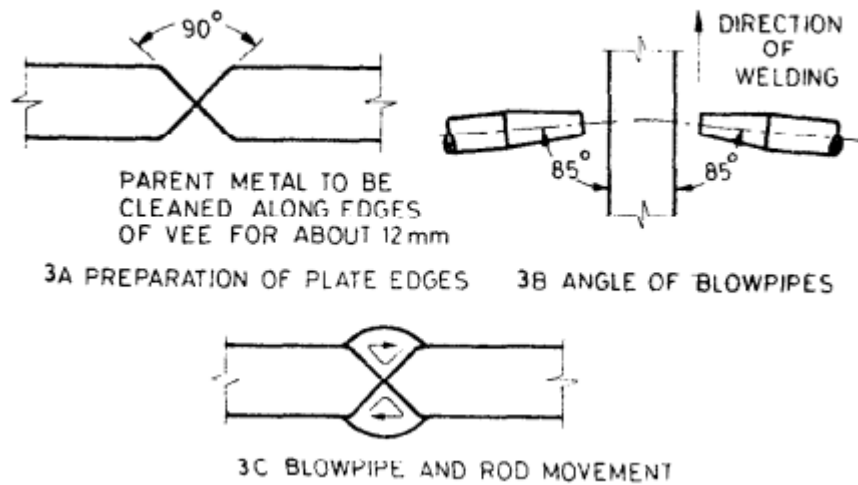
PREPARATION AND TECHNIQUE FOR TWO-OPERATOR VERTICAL BRONZE WELDING OF CAST IRON
